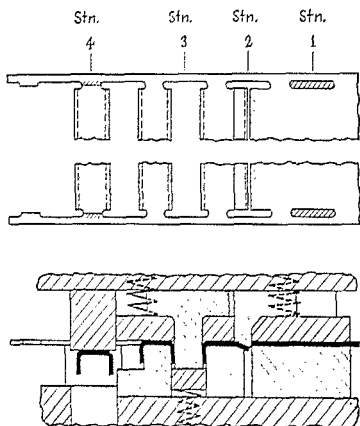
Channel forming progressive die. (C. R. Cory.)
